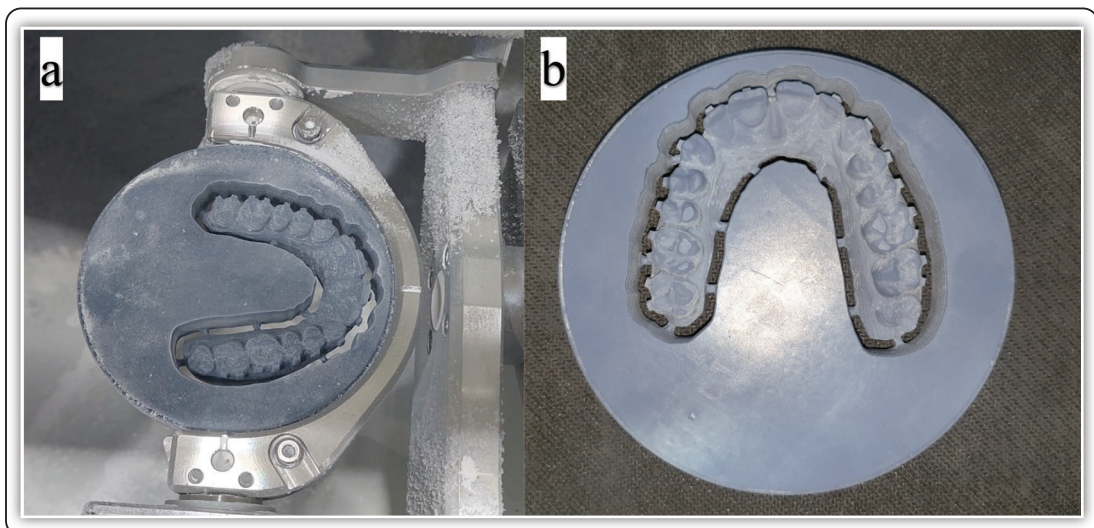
a) the 3D printed disc in the milling machine after milling of the model, b) the 3D printed disc after removal from the milling machine.
